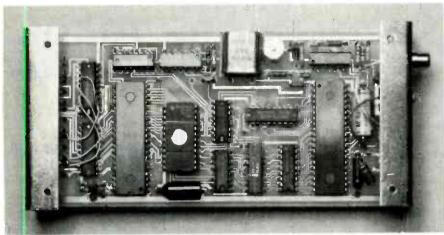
PC BOARD IS MOUNTED component-side-down in enclosure.
